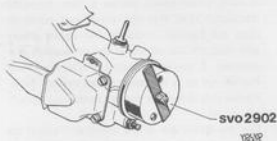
Tools for adjusting engine speed during ignition setting. B 20 E, B 20 F
